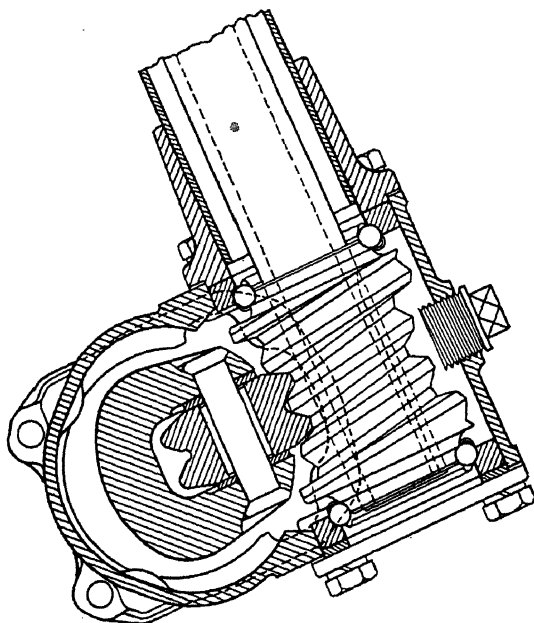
Double Roller Type Marles Steering Gear, showing Worm or Cam.
